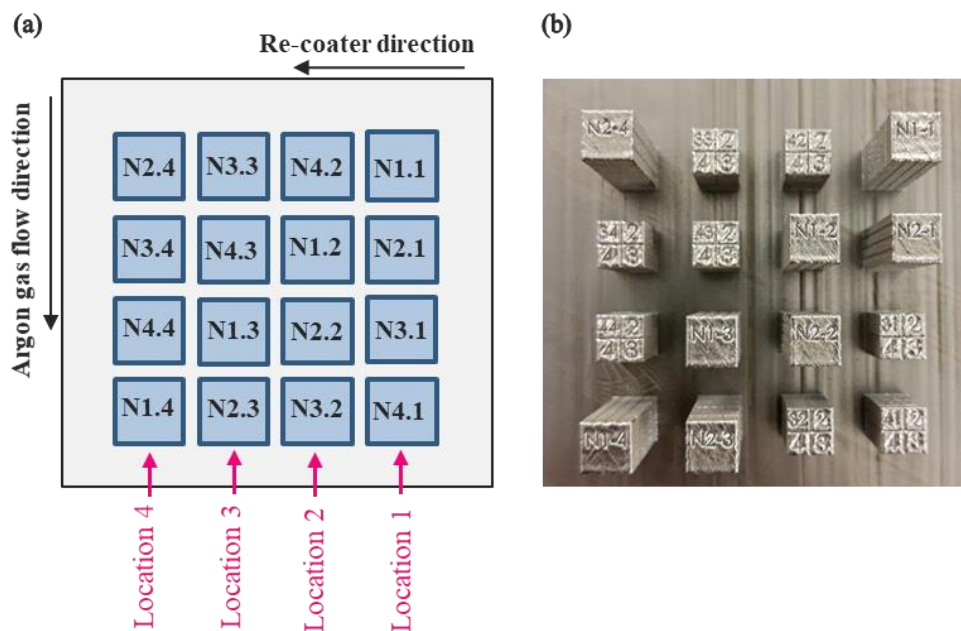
(a) Sample layout and (b) printed samples on the build plate
